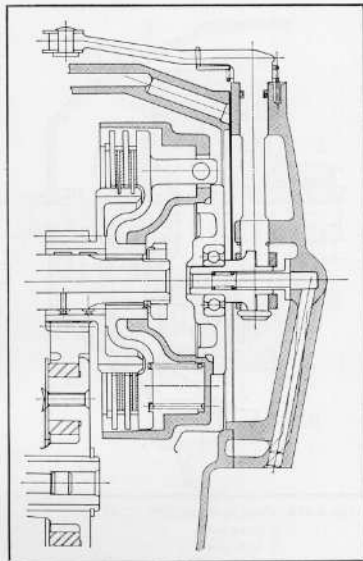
A Clutch mechanism S 90, CL 90, CL 90 L, CD 90
